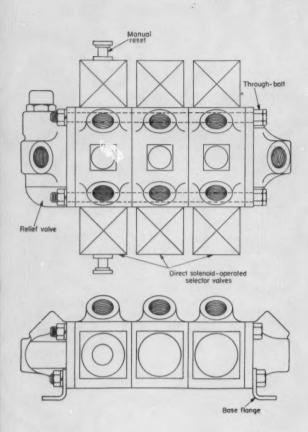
Banked valves are similar to subplate valves, but do not incorporate a subplate manifold. Adjacent valve-housing faces are machined flat, and mating pressure and return ports are common to all valves. As number of individual valves increases, stretch in through-bolts reduces contact forces between valve mating faces and gives possibility of leakage.
